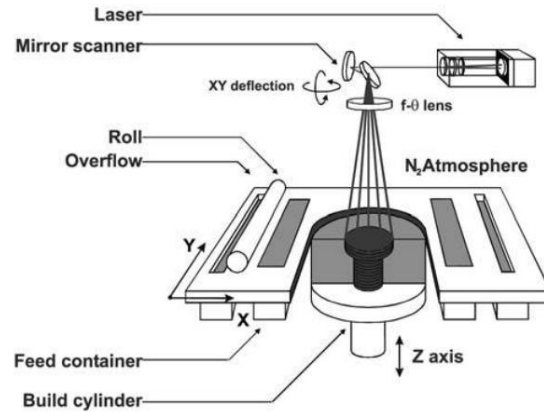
Typical lay-out of a Laser Sintering machine [5]
